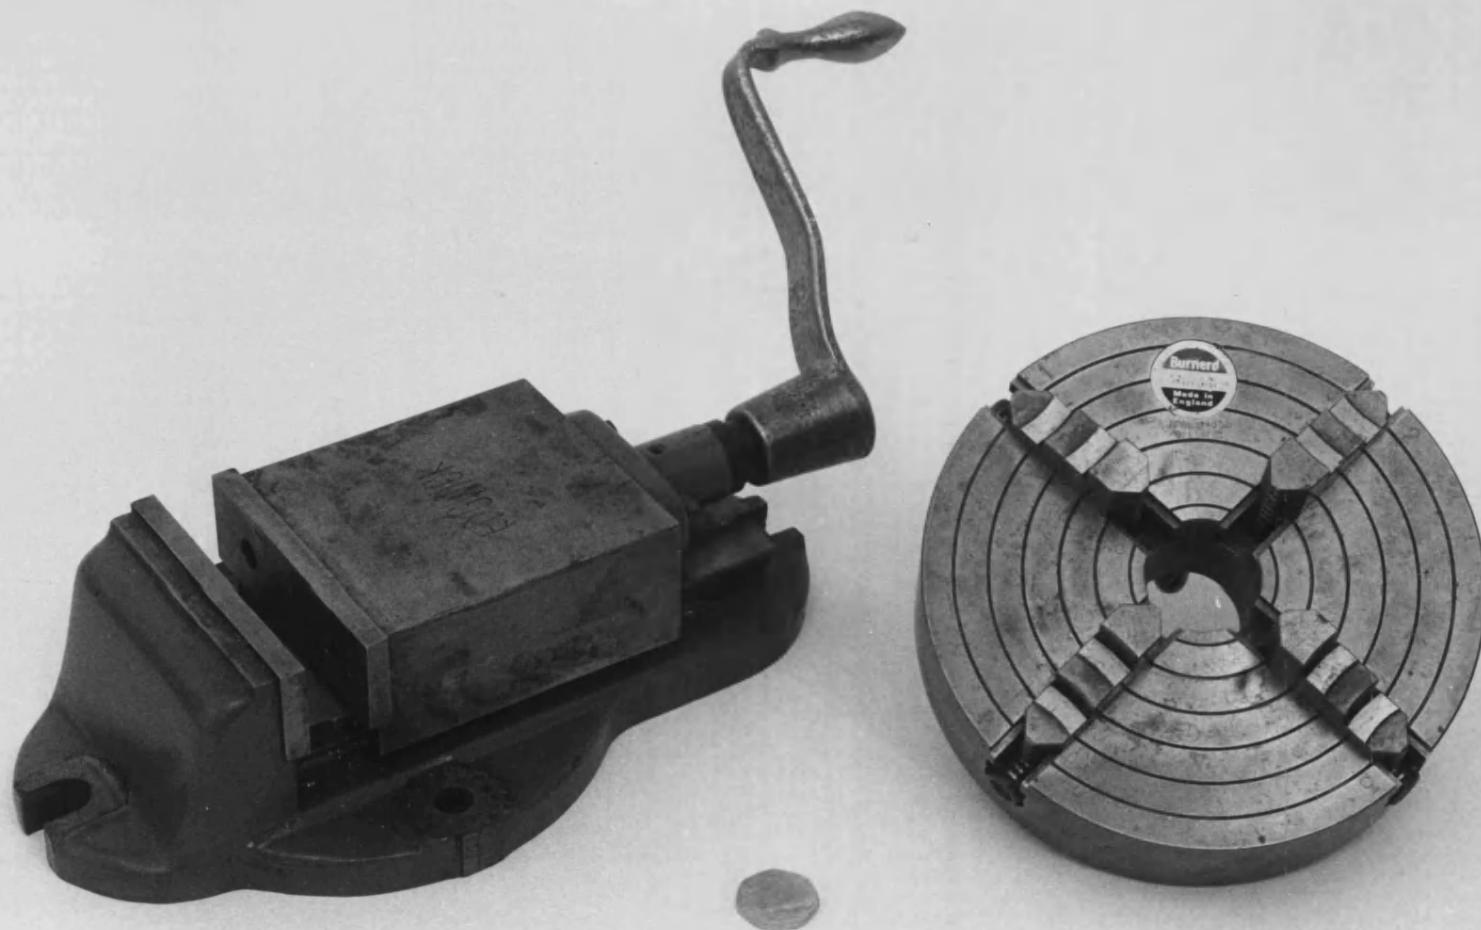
Standard fixtures: milling vice and 4 jaw chuck
